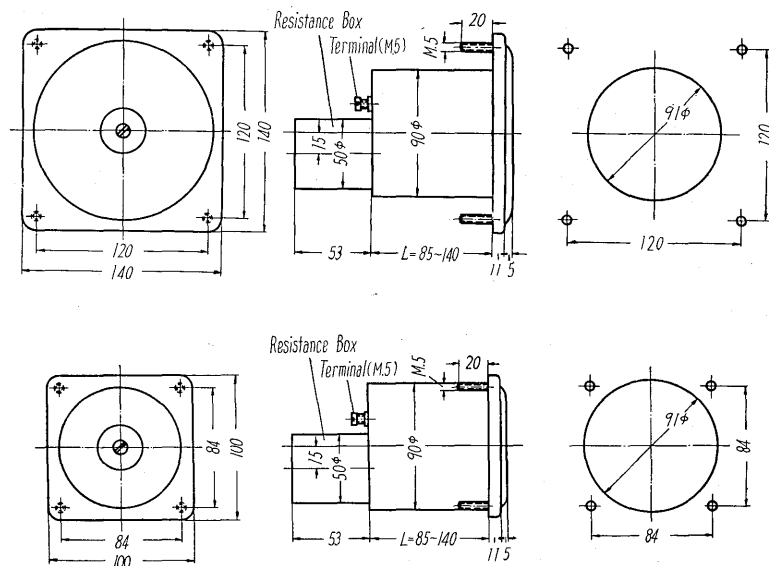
Outline Dimensions and Drilling Plans of Wide Angle type Instruments
